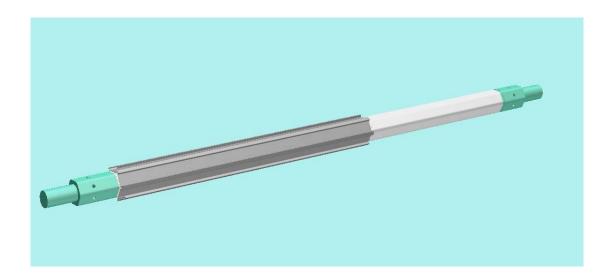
Outer shell installed over inner shell and cooling tubes (cooling tubes not shown).
